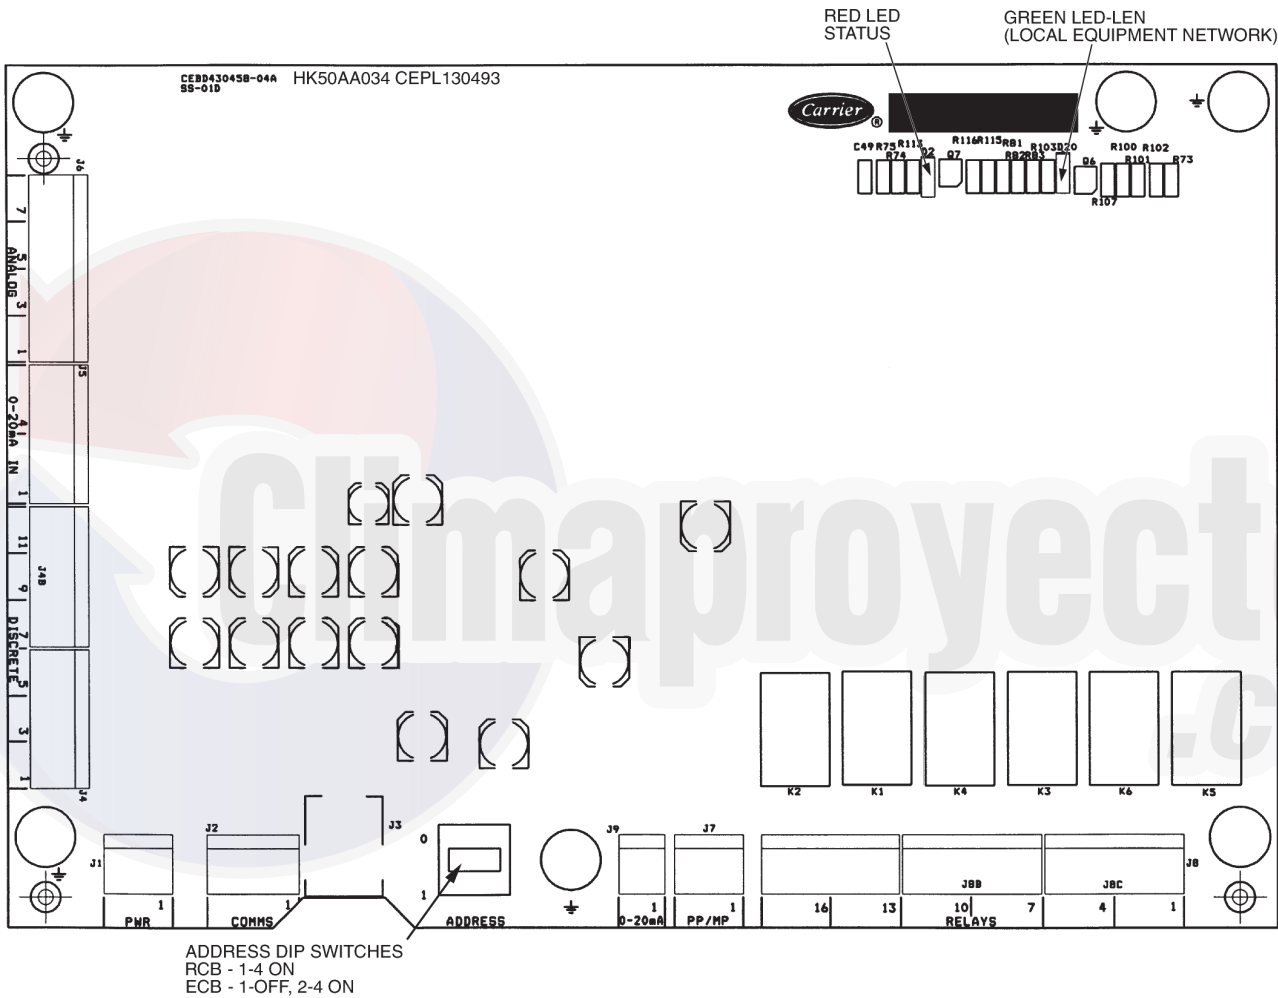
Economizer Control Board (EXB) and Rooftop Control Board (RXB)
